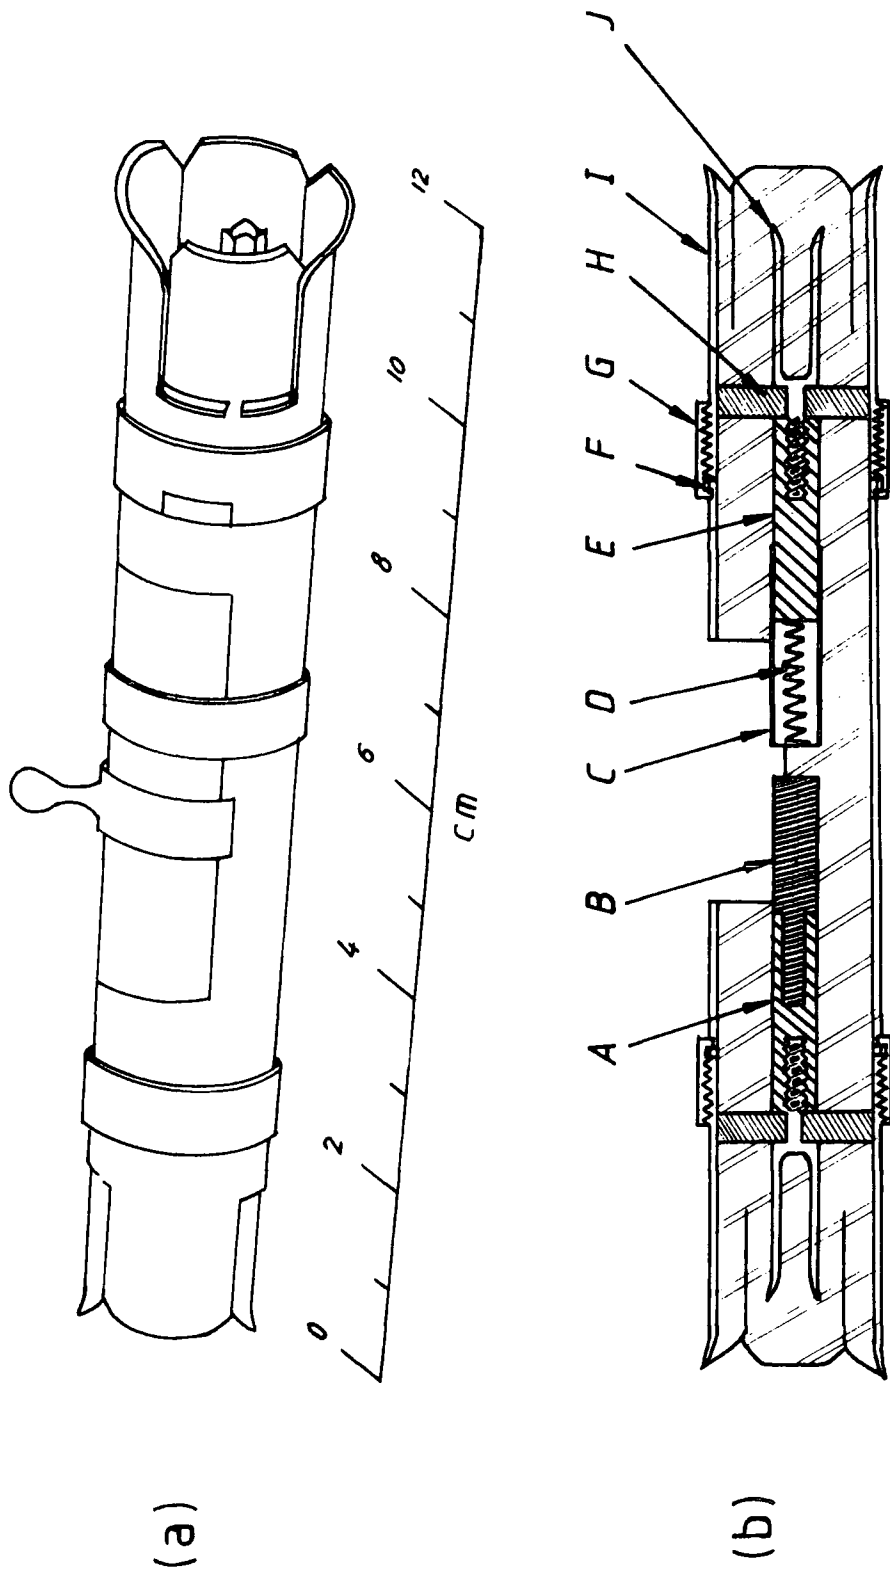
(a) External view and (b) cross-section of sample-holder used in this work
